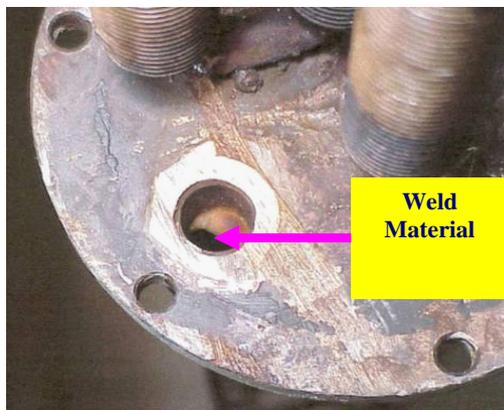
Photograph showing the obstruction in the flow path at the flange due to defective welding.
